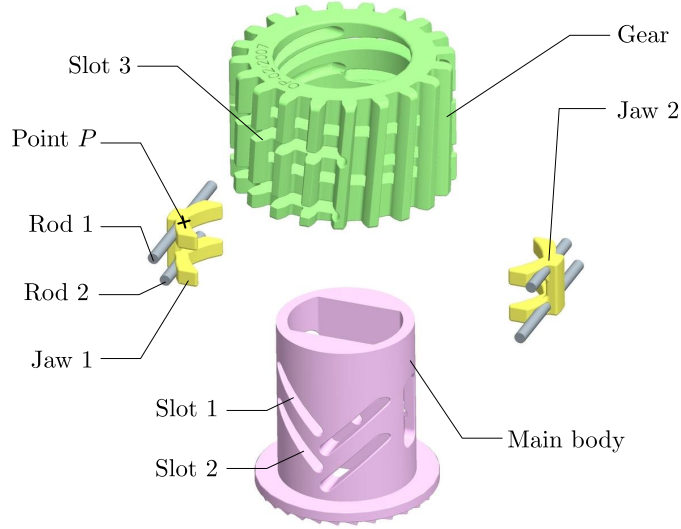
Exploded CAD view of a rigid-body NGD [Piccin et al., 2009].
